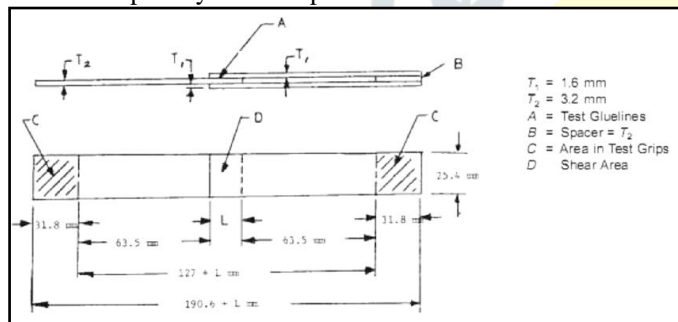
Double lap joint test specimen according to standard ASTM D3528-96
